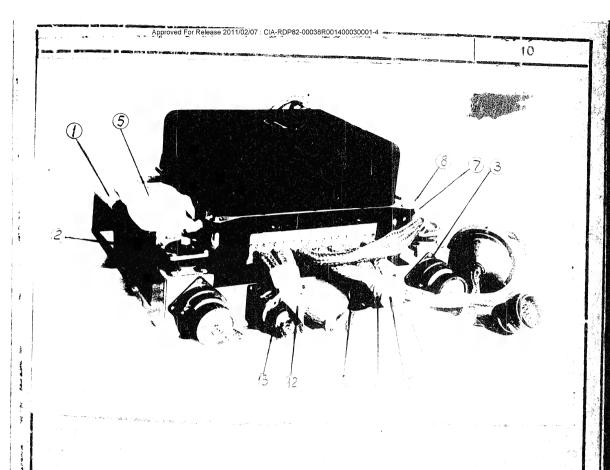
H-C Gyro Unit-to-Mounting Attachment
